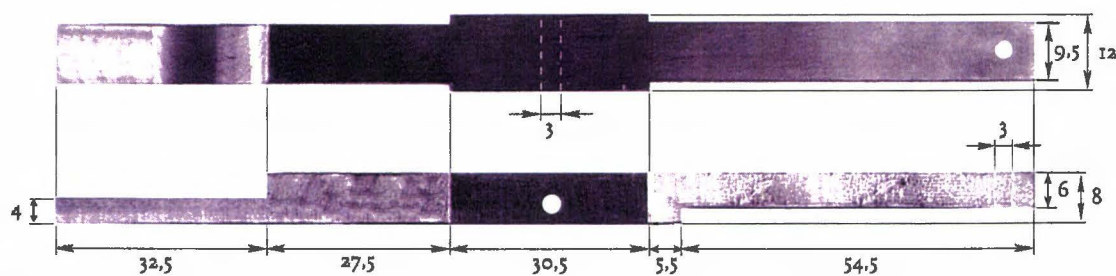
Dimensioning of the indenter unit; indenter arm, top and side views
